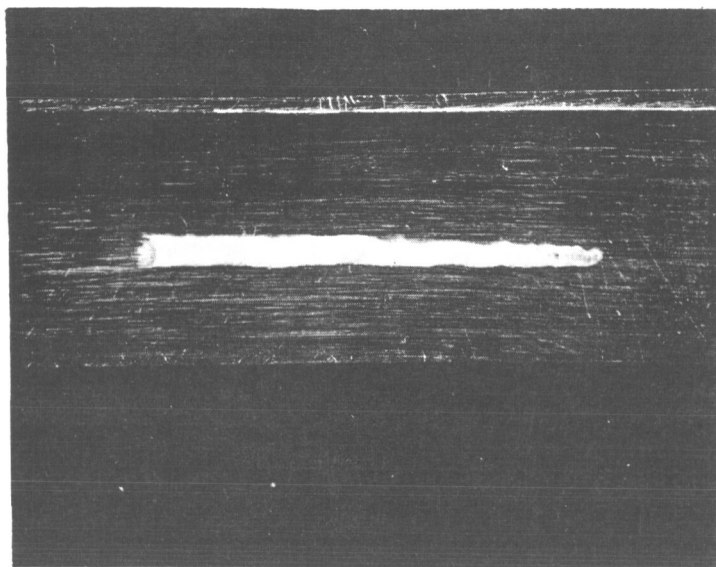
Photomacrograph of AZ31 Magnesium seam weld. Weld schedule: 1.99 volts, 20 lbs. pressure, 30 inches/minute speed.
